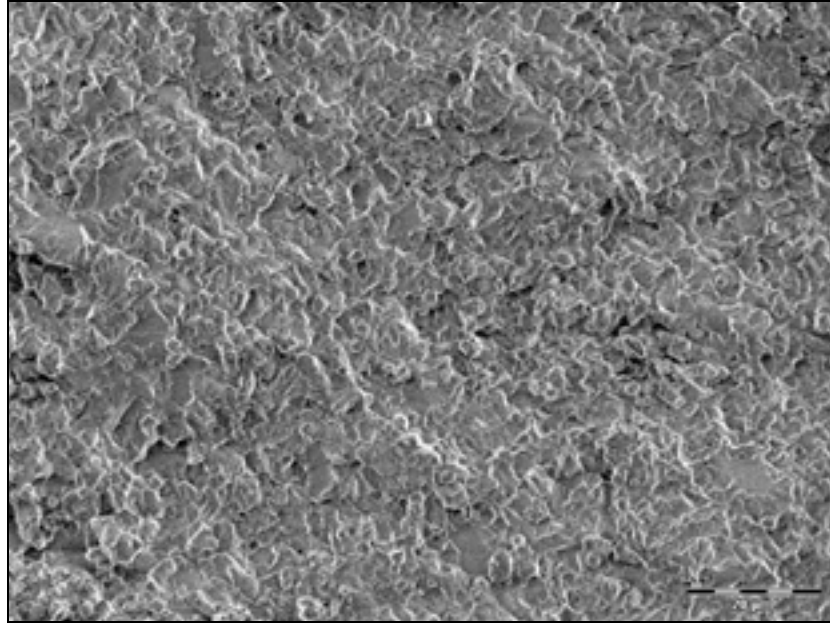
ESEM photo of fracture surface for type III.
